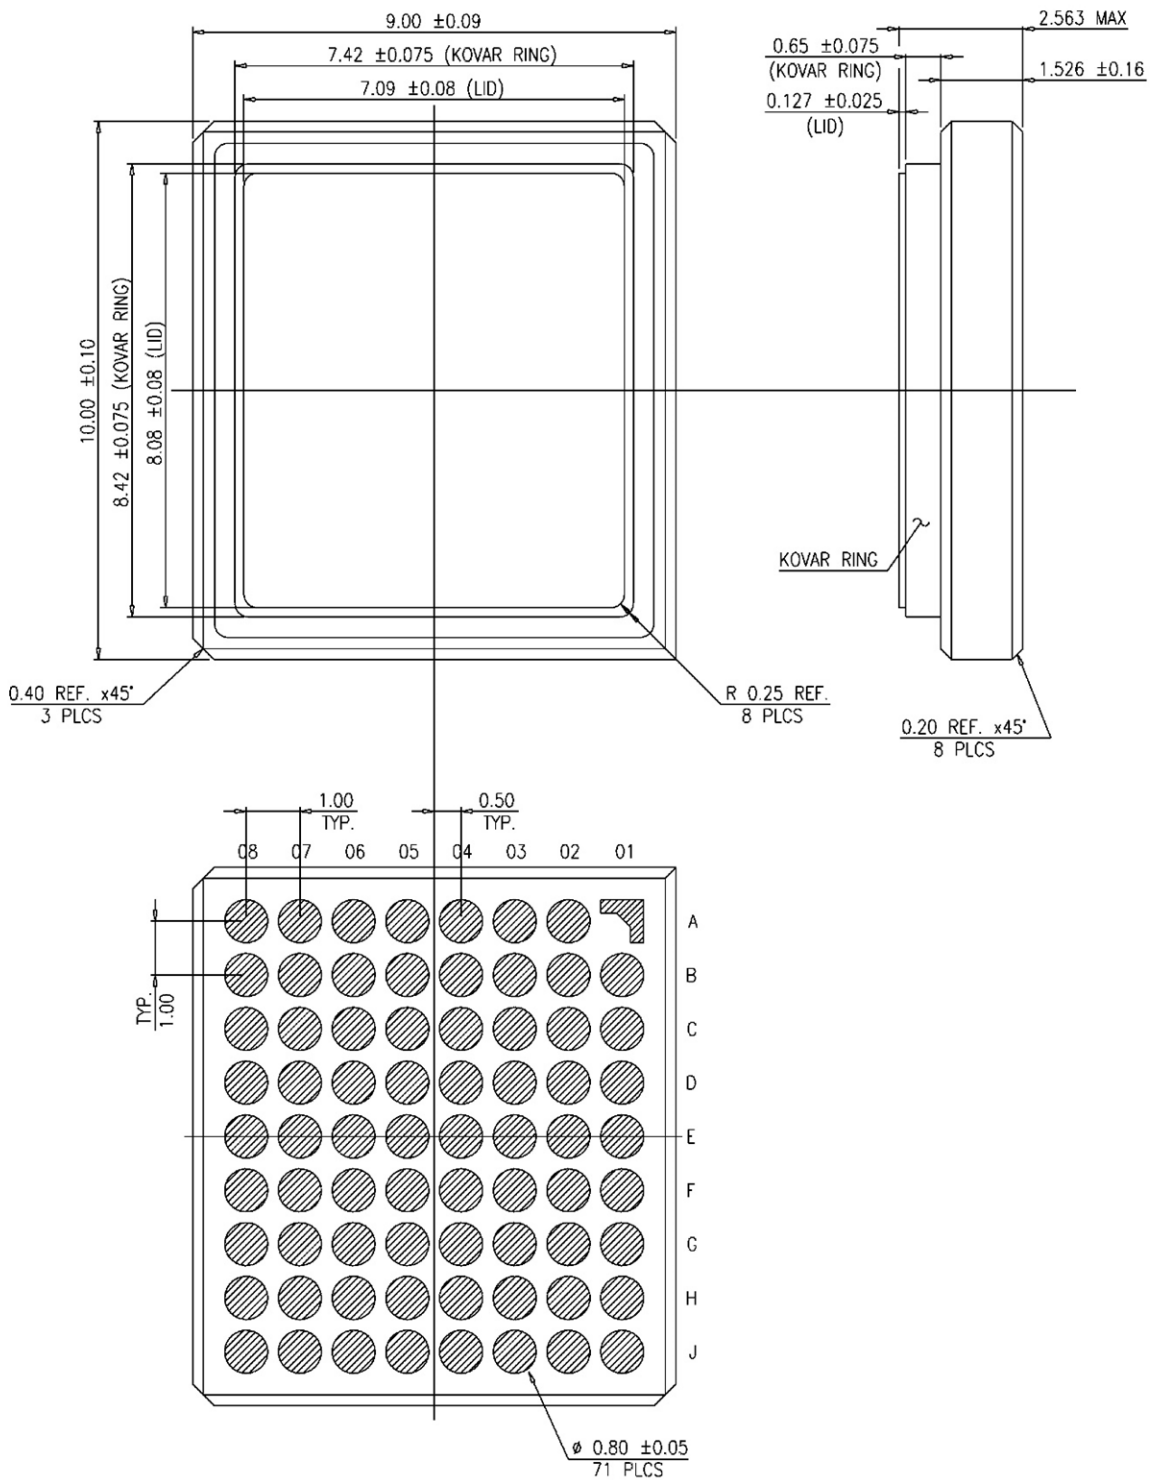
71-Pin Ceramic Land Grid Array (C-LGA) Package
